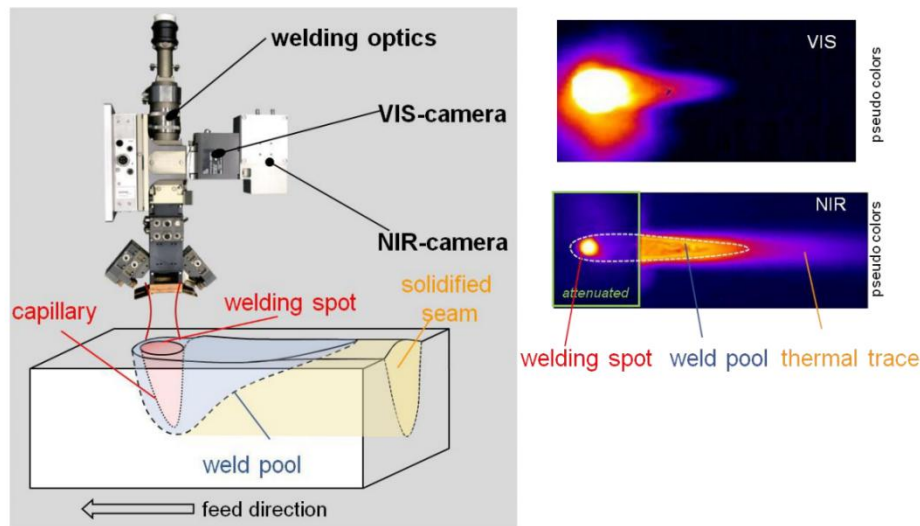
The welding zone at deep-penetration welding consists basically of three areas: the capillary at the location of the welding spot, the liquid weld pool and the solidified seam [71]-[72].
